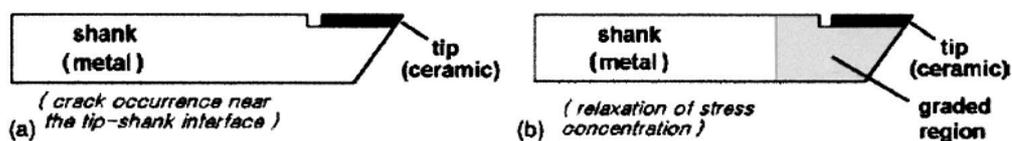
lathe metal cutting tool bites: (a) conventional type: (b) FGM design [6]
